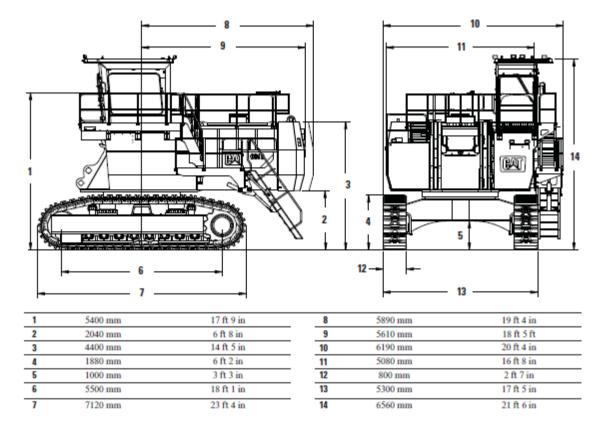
Dimensions of CAT 6018 FS hydraulic excavator [17]
